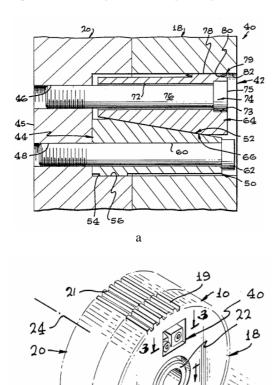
Operating principle of an anti-backlash system with two coaxial pinions working on opposite flanks by means of a wedge and Bellevile spring [9]: a – two wedge system in axial section; b –axonometric view of the split gear.
